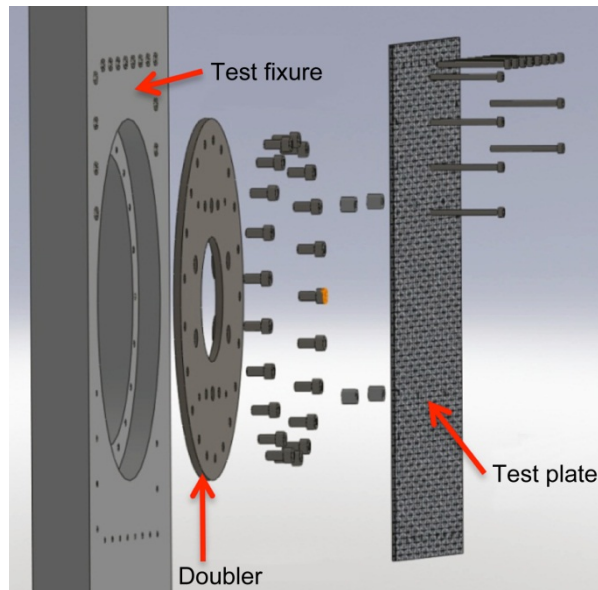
Test fixture, doubler, and representative test plate; with exploded view.
